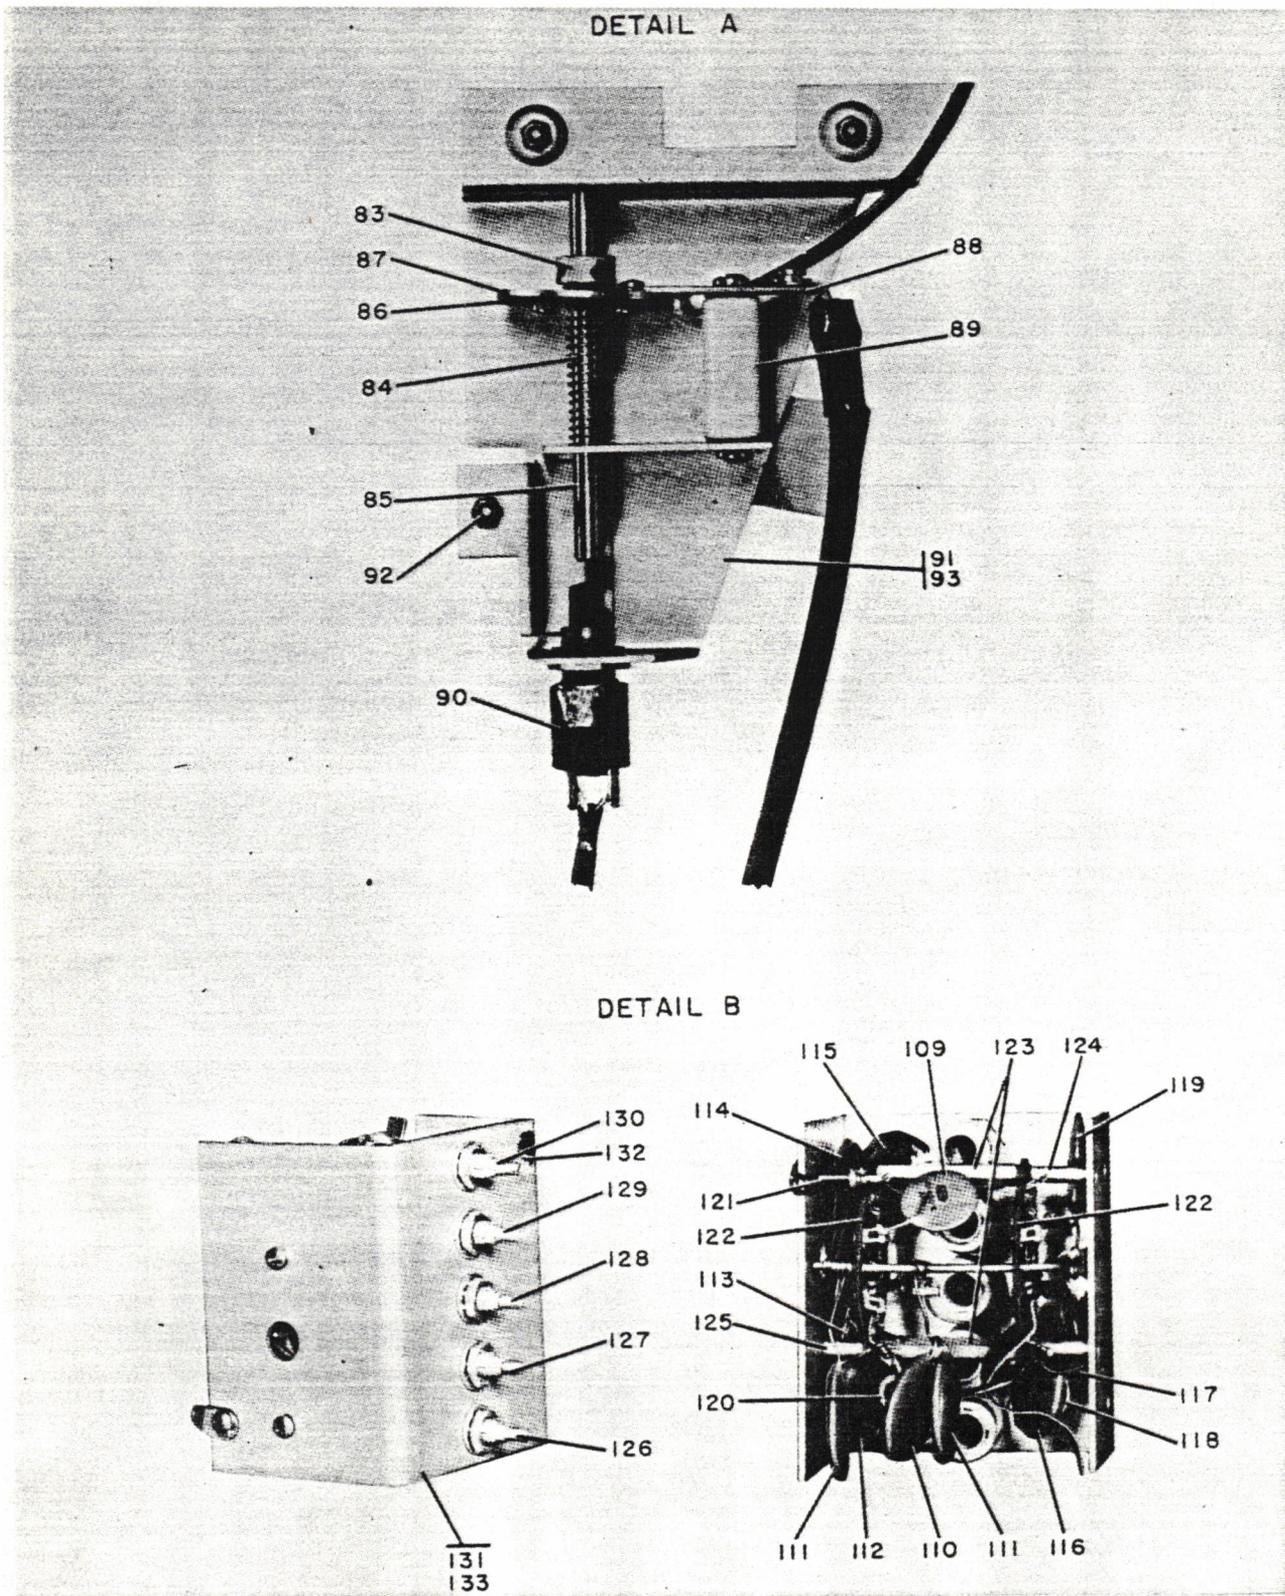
Cabinet Assembly (Sheet 3 of 3)
